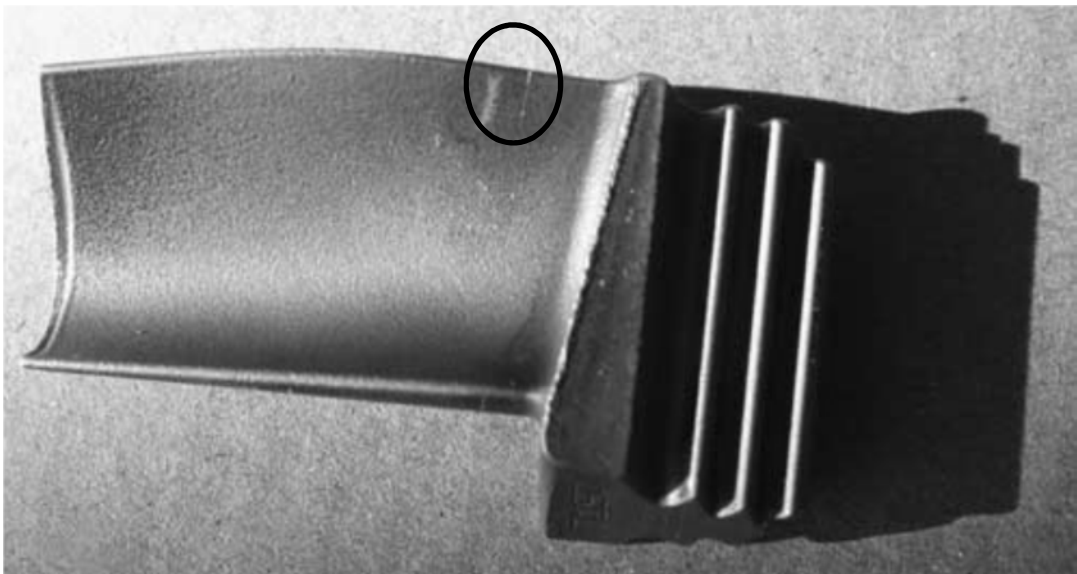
Fatigue crack initiating (blade trailing edge) [6]
